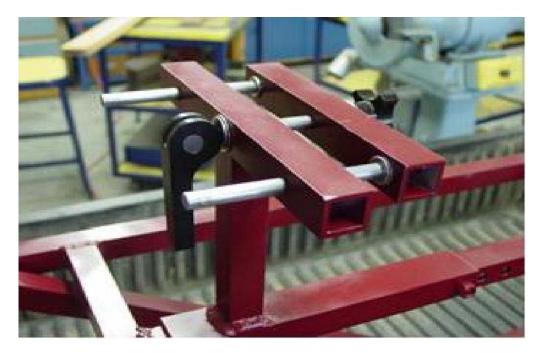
Clamping Mechanism to Hold Wheelchair
